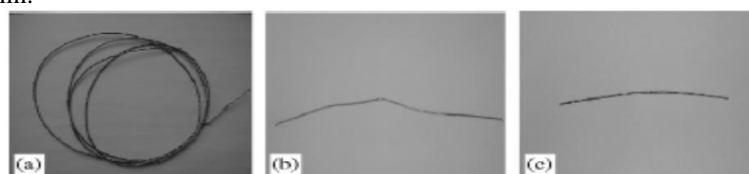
Chip shape for finish turning Inconel 718 under cooling/lubrication conditions (a) Dry
